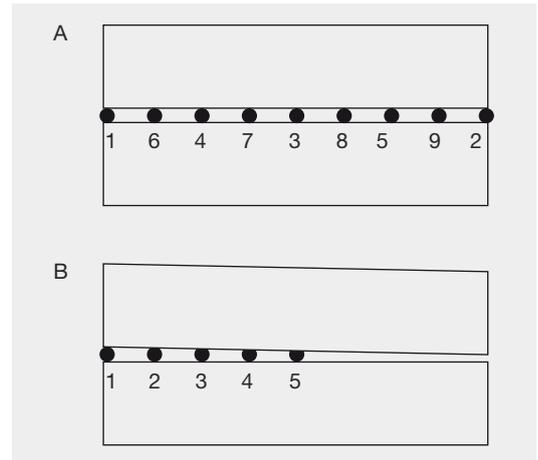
Proper tacking sequence to avoid closing of the gap during welding. A: Correct, B: Incorrect. (3)
